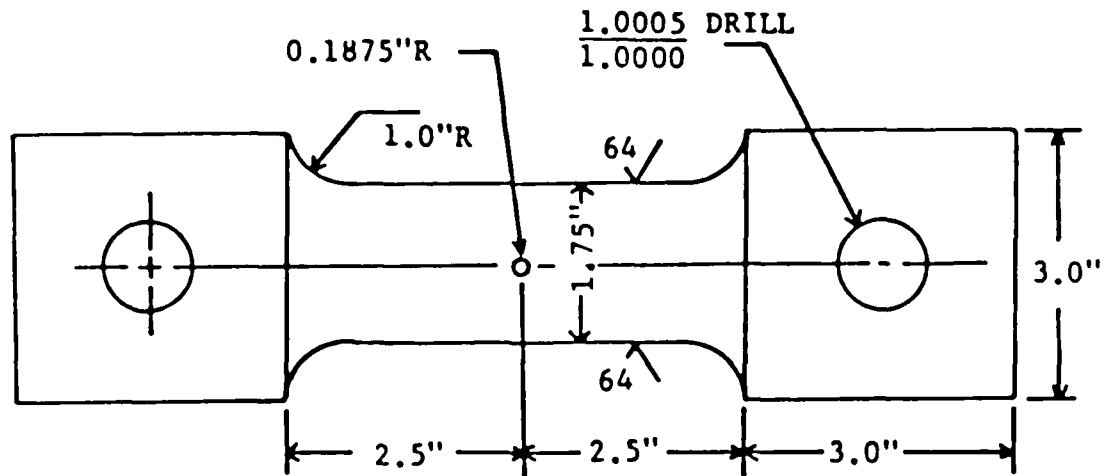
Fatigue Crack Initiation Specimen Geometry
